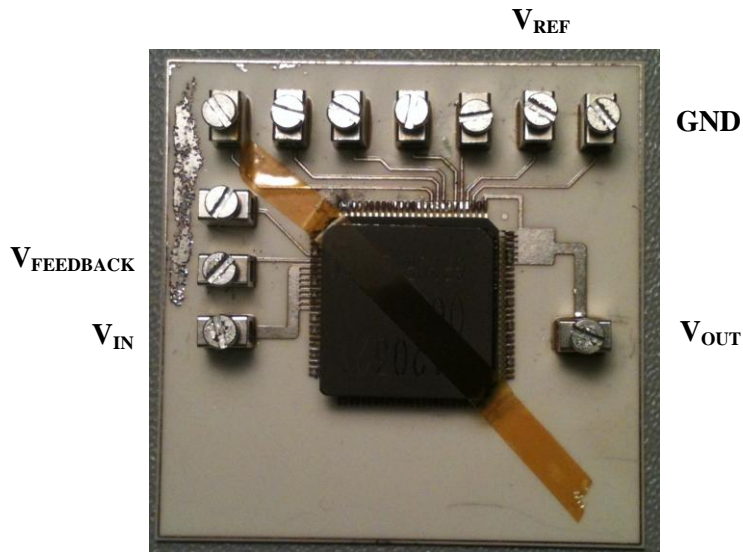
Packaged die mounted on DBC board used for testing.
